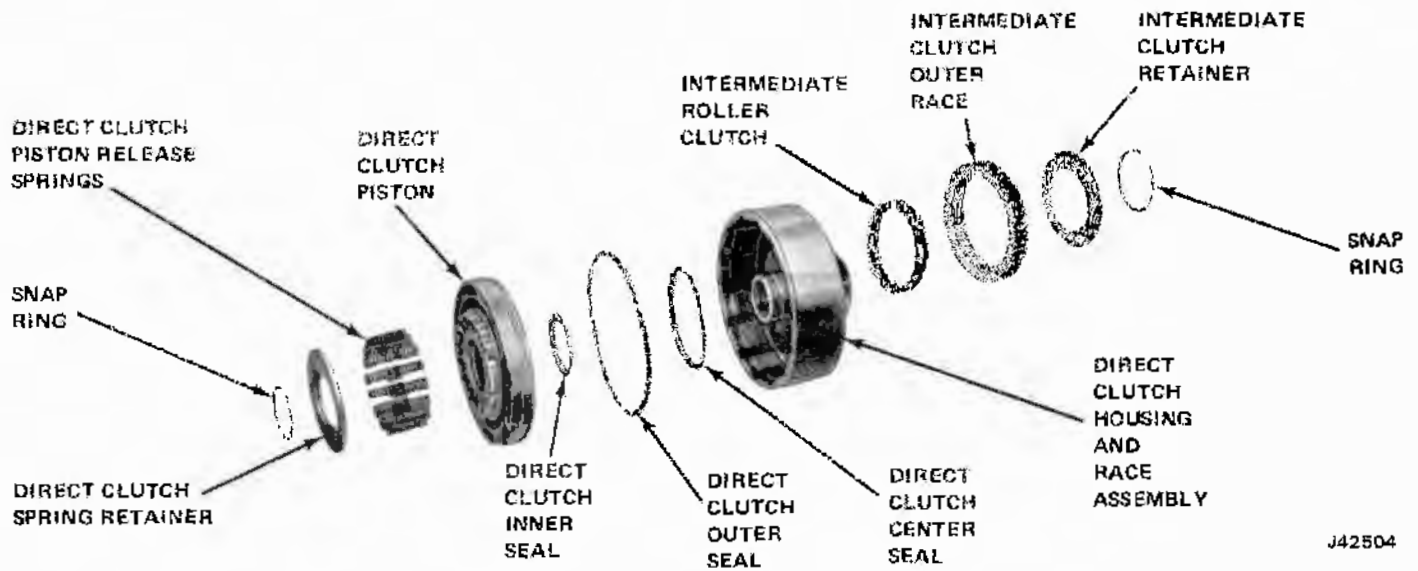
Intermediate Clutch, Roller, and Direct Clutch Components
